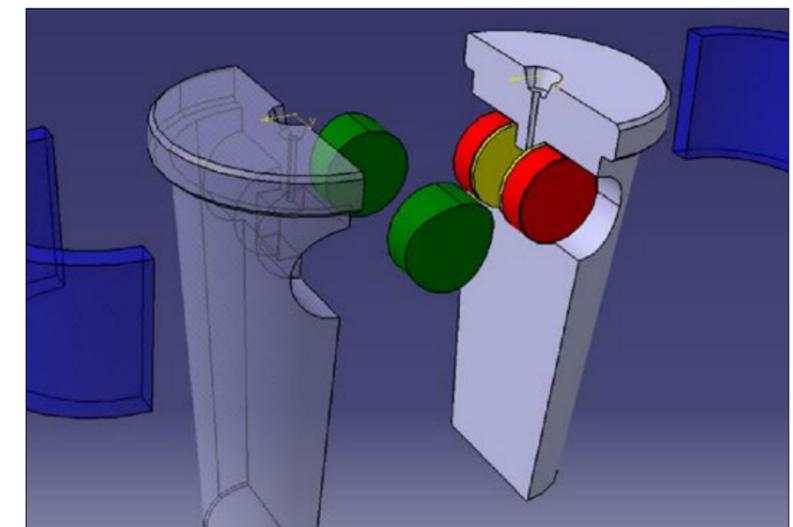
Injection moulding tool for NdFeB magnets [1] (Courtesy EPMA)
